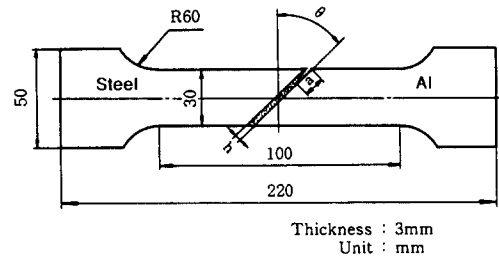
Shape and dimension of adhesively bonded joint specimen
